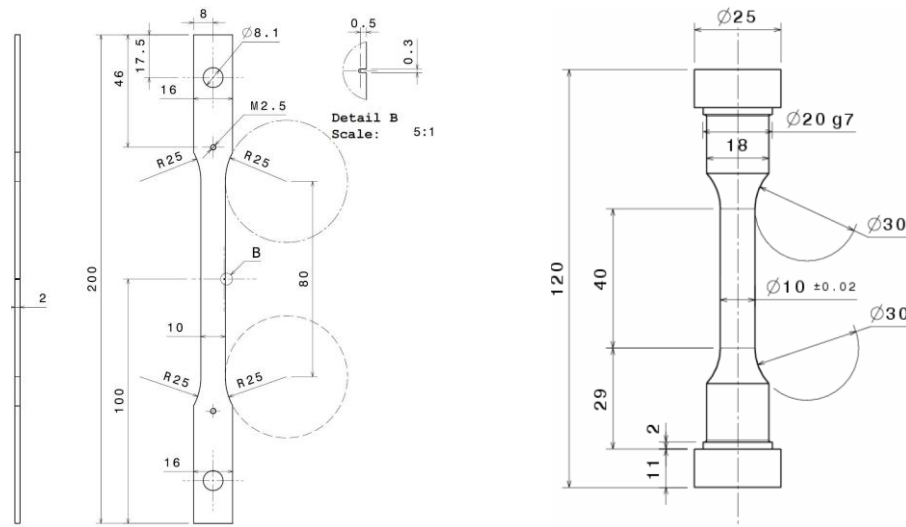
Round bar (right one) and single edge notched specimen (all dimensions in mm)
